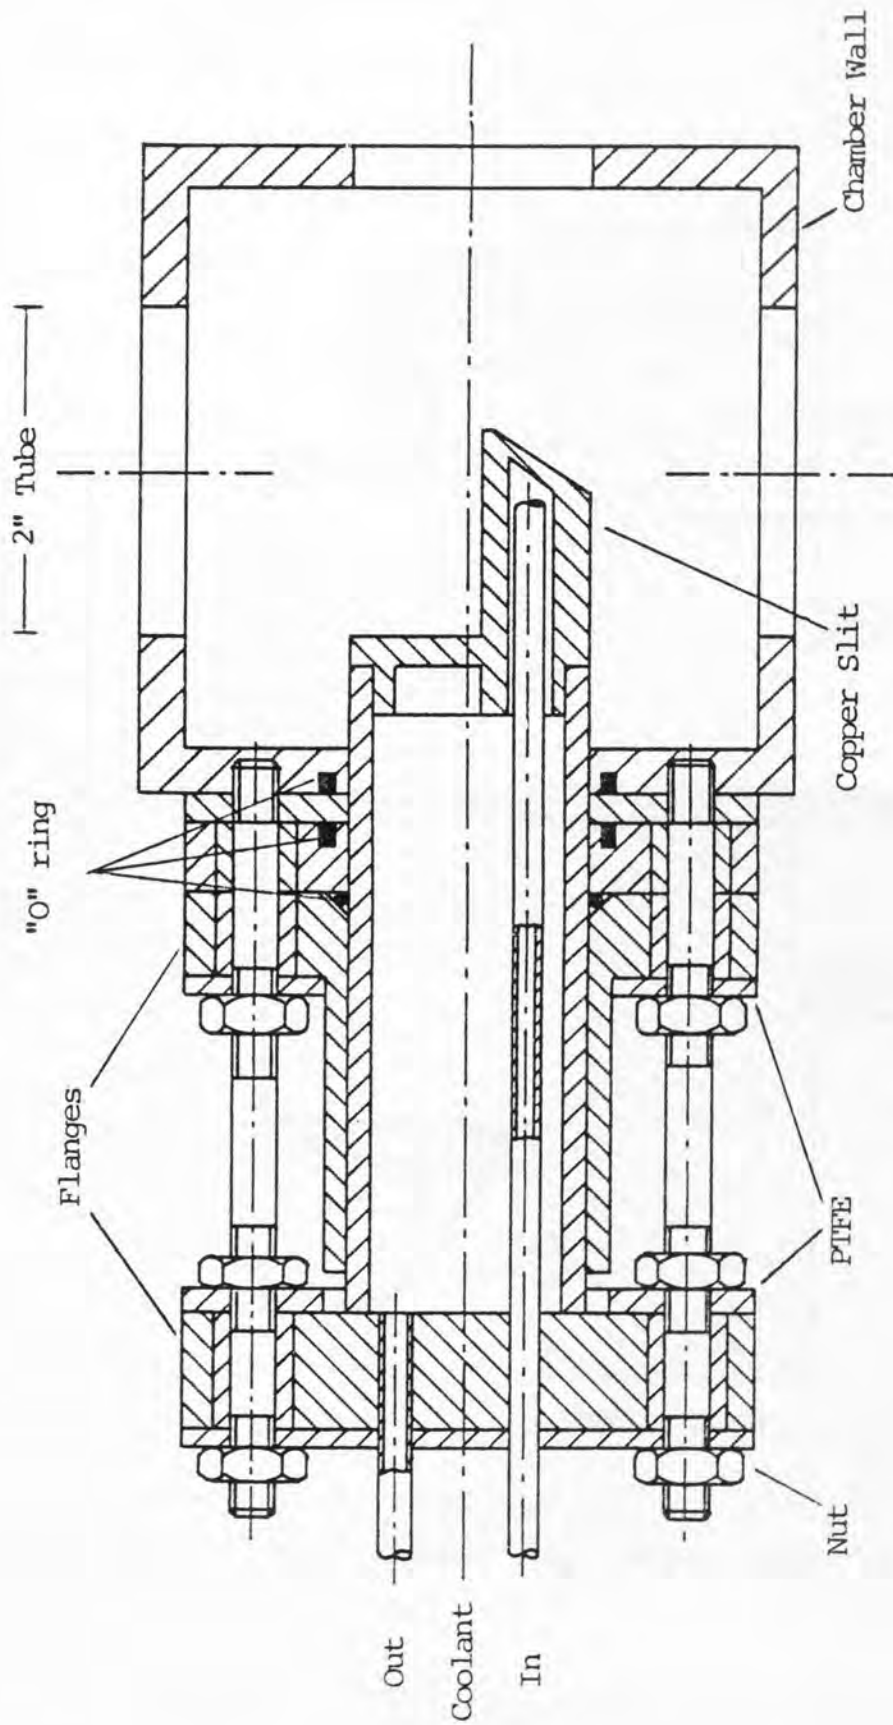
Cross-sectional view of four slit collimator assembly.
